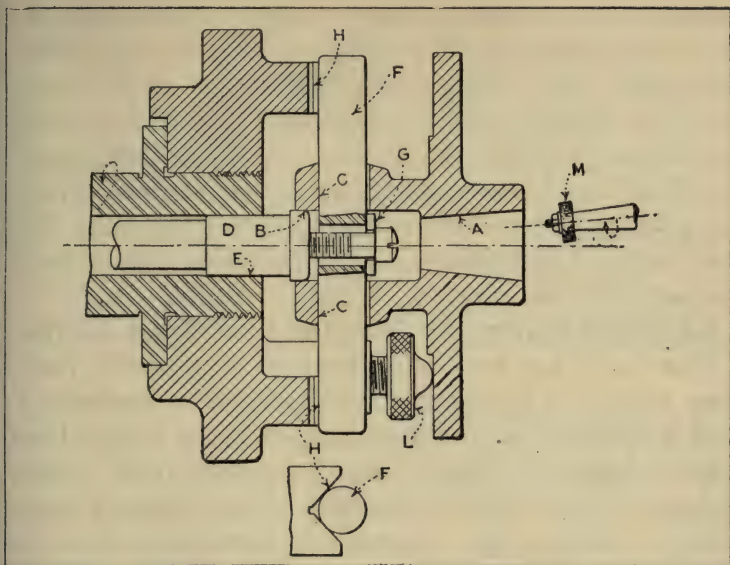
GRINDING FIXTURE FOR A UNIVERSAL JOINT MEMBER
